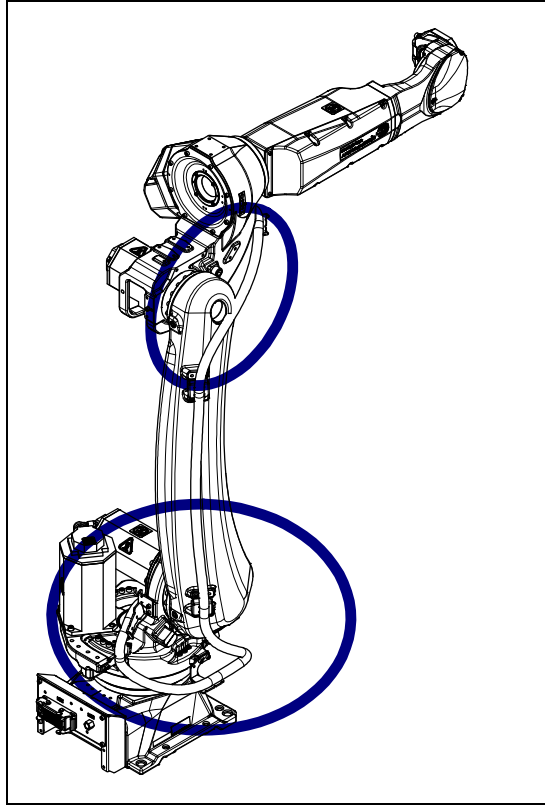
(a) Inspection points of the mechanical unit cables
